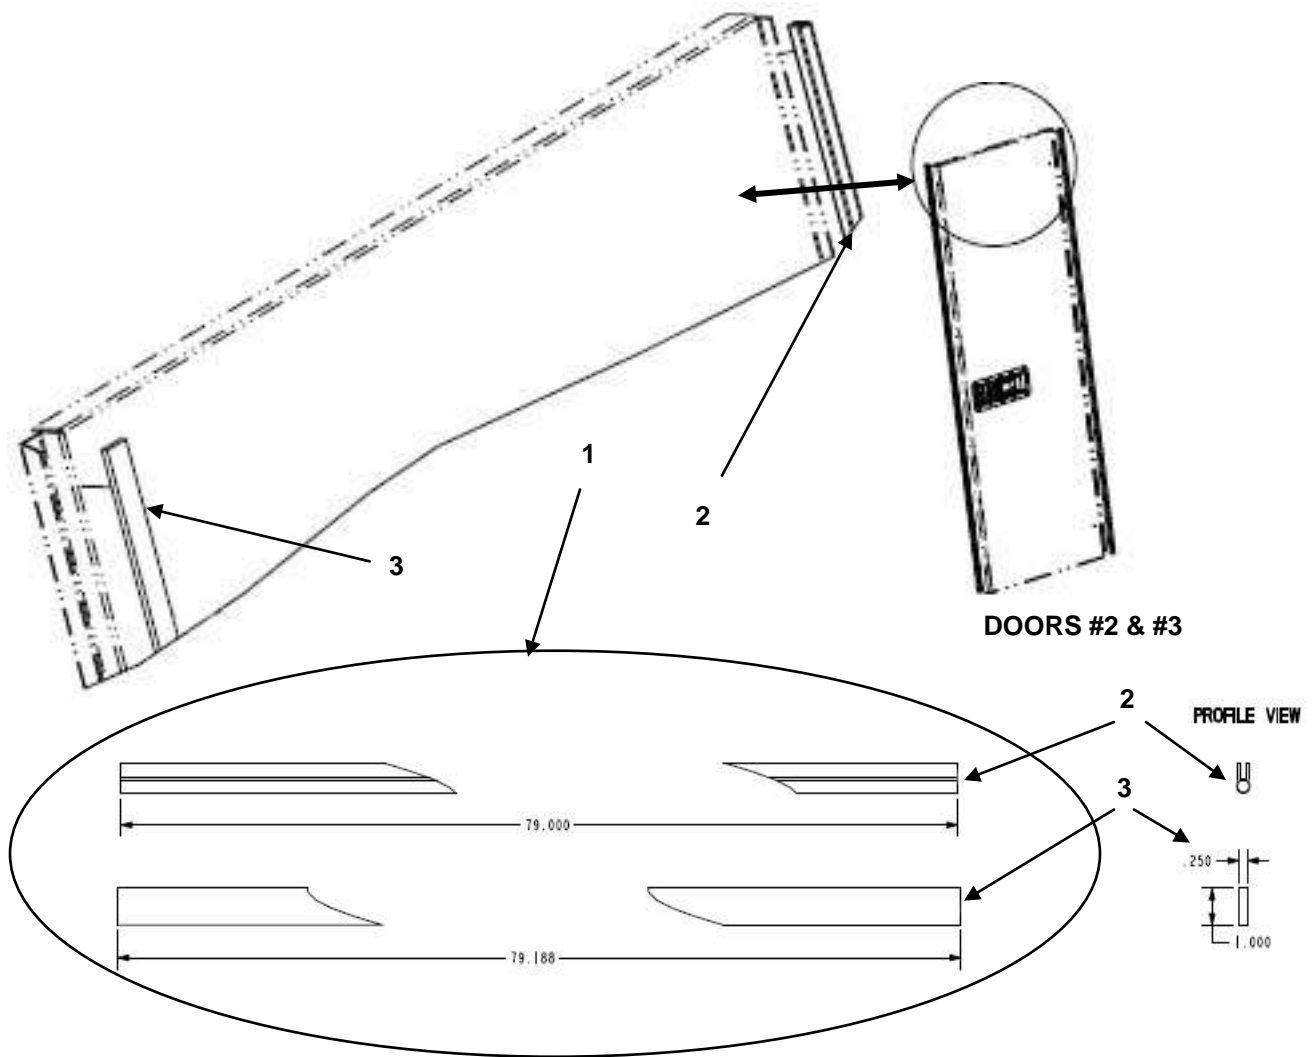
FPU 8-2 POCKET DOOR #2 & #3 EDGE SEALS
